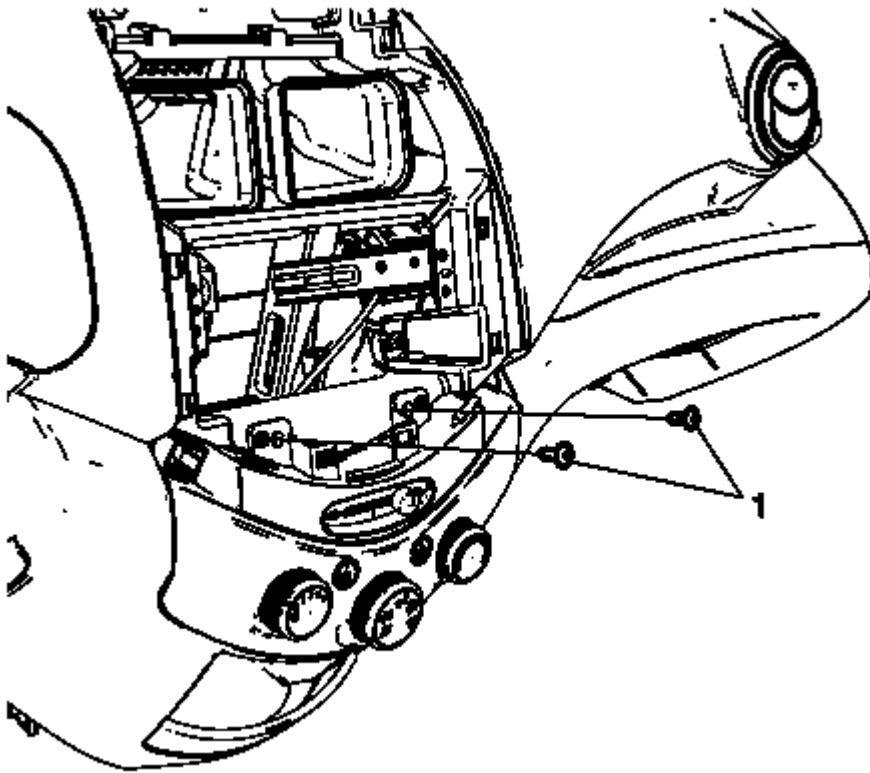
Heater And Air Conditioning (A/C) Control Screws
